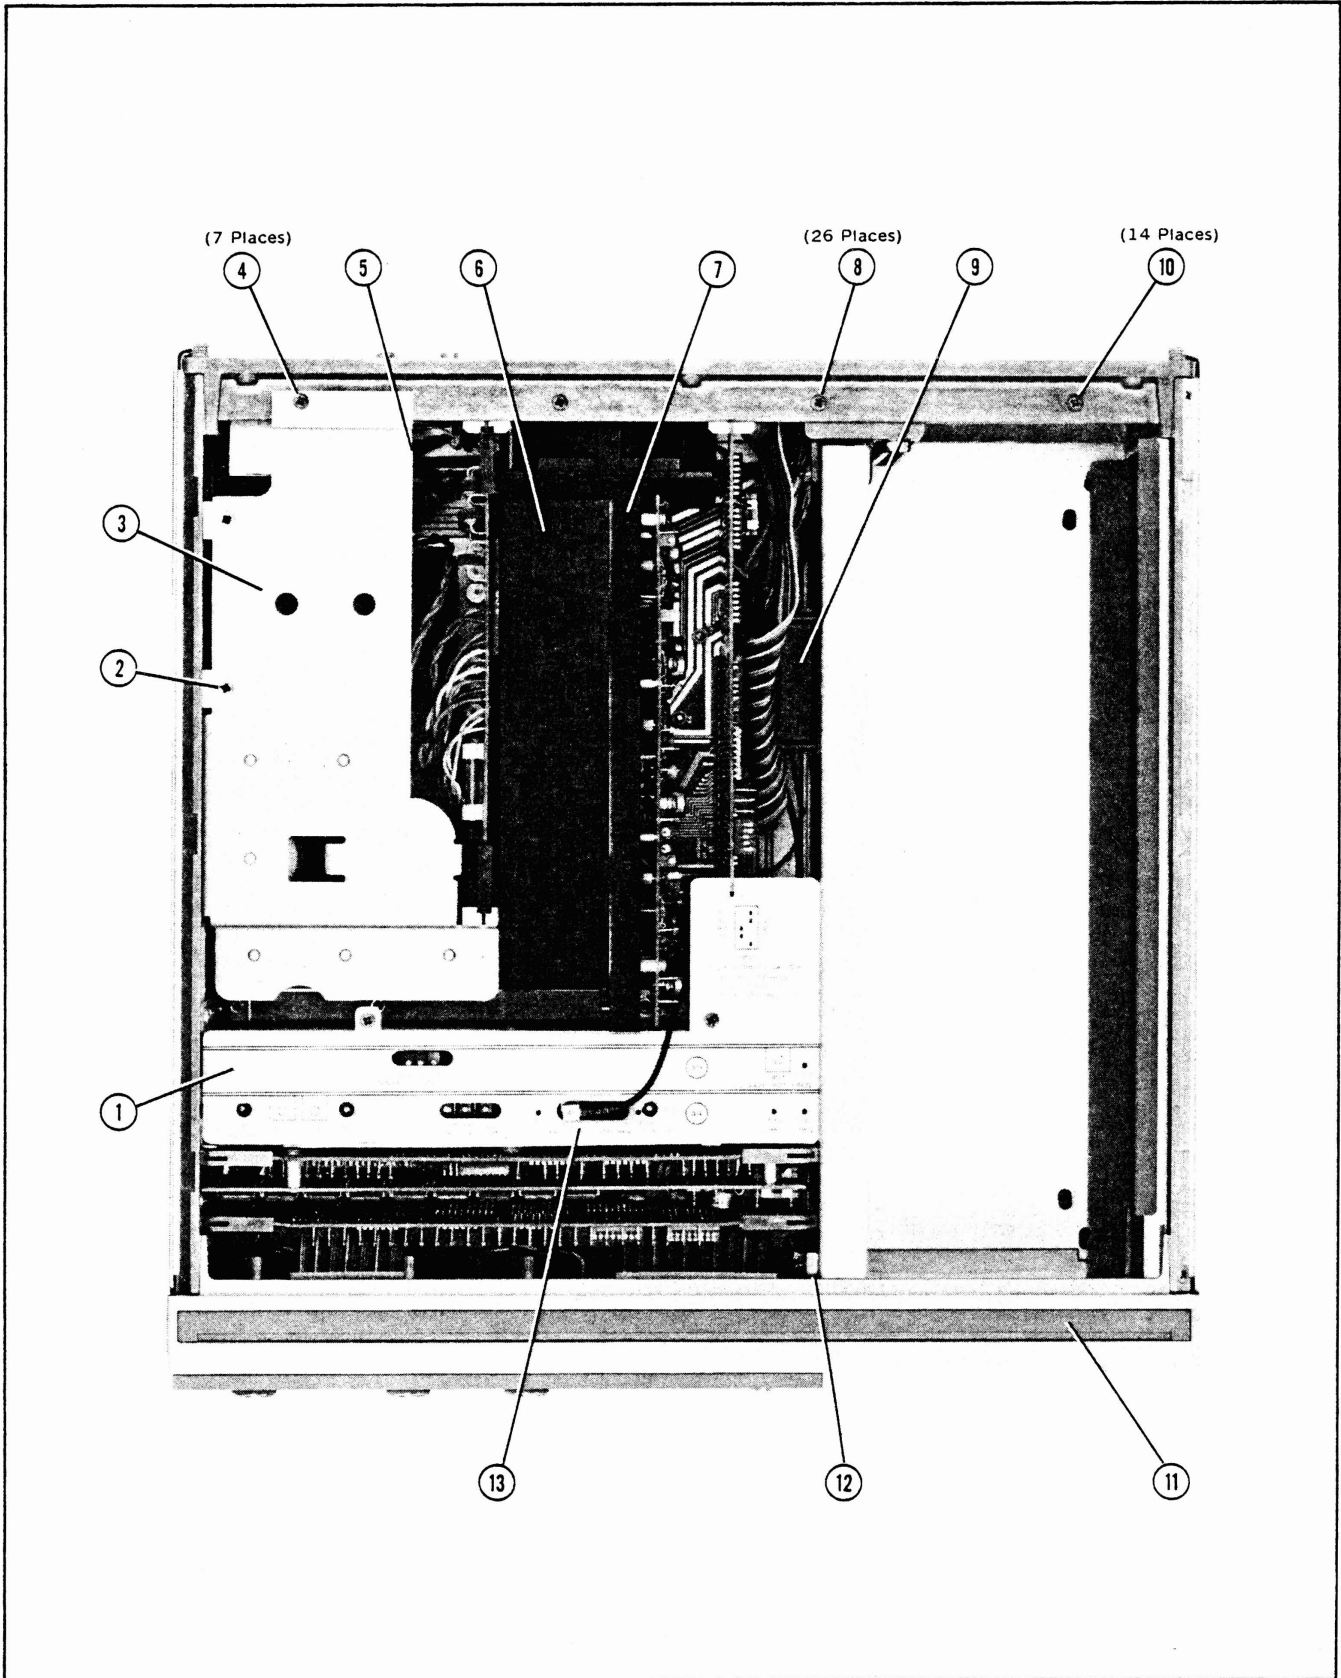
Top View With Covers, Parts Identification (1 of 2)
